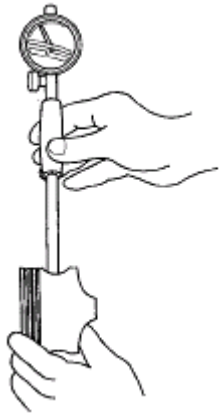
Checking Difference Between Piston Pin Diameter & Piston Pin Hole Diameter
